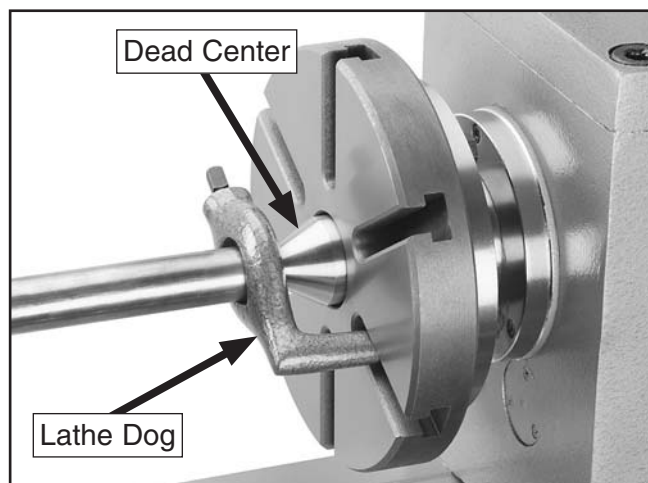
Stock supported between centers using a chuck and lathe dog on the spindle.
